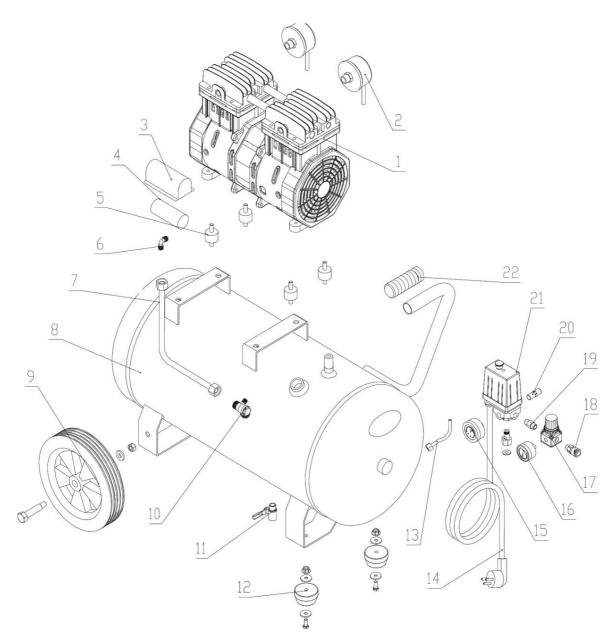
Spare parts Mobilboy Silence 241/50 OF E
